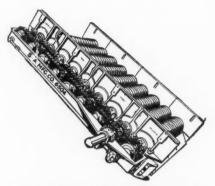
Roll grizzly with housing removed, showing location of oil pump
